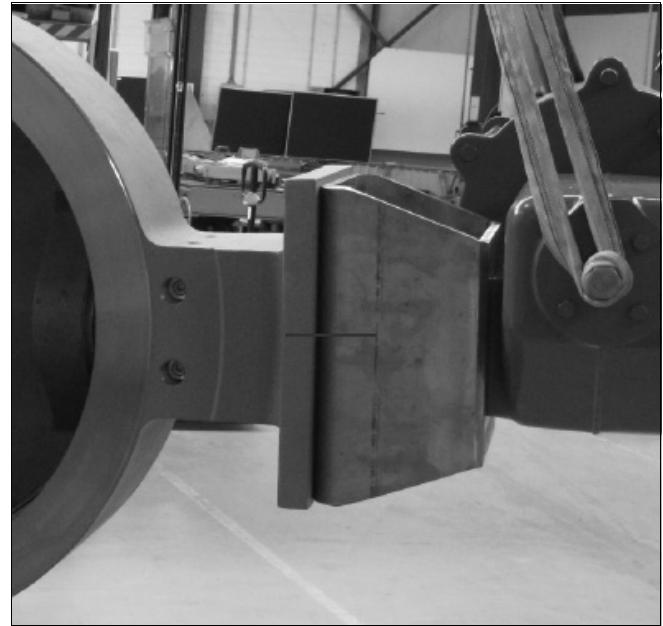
Before detaching the actuator, mark its position in relation to the drive shaft and the disc on the bracket
